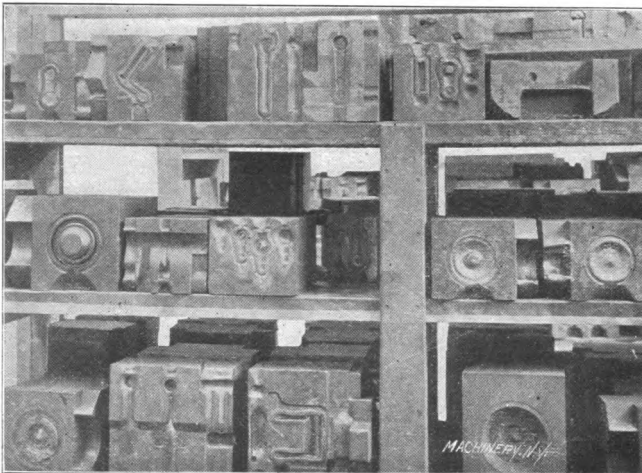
A Few Examples of Drop Forging Dies in Storage
